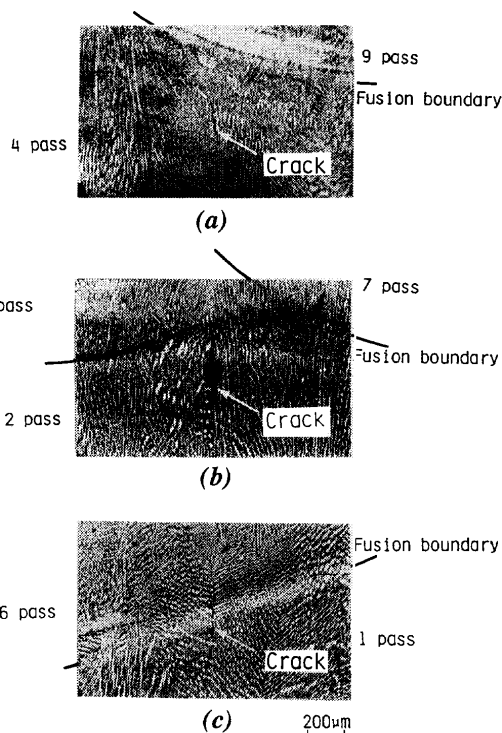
Microcrack appearance and location in the multipass welds.
